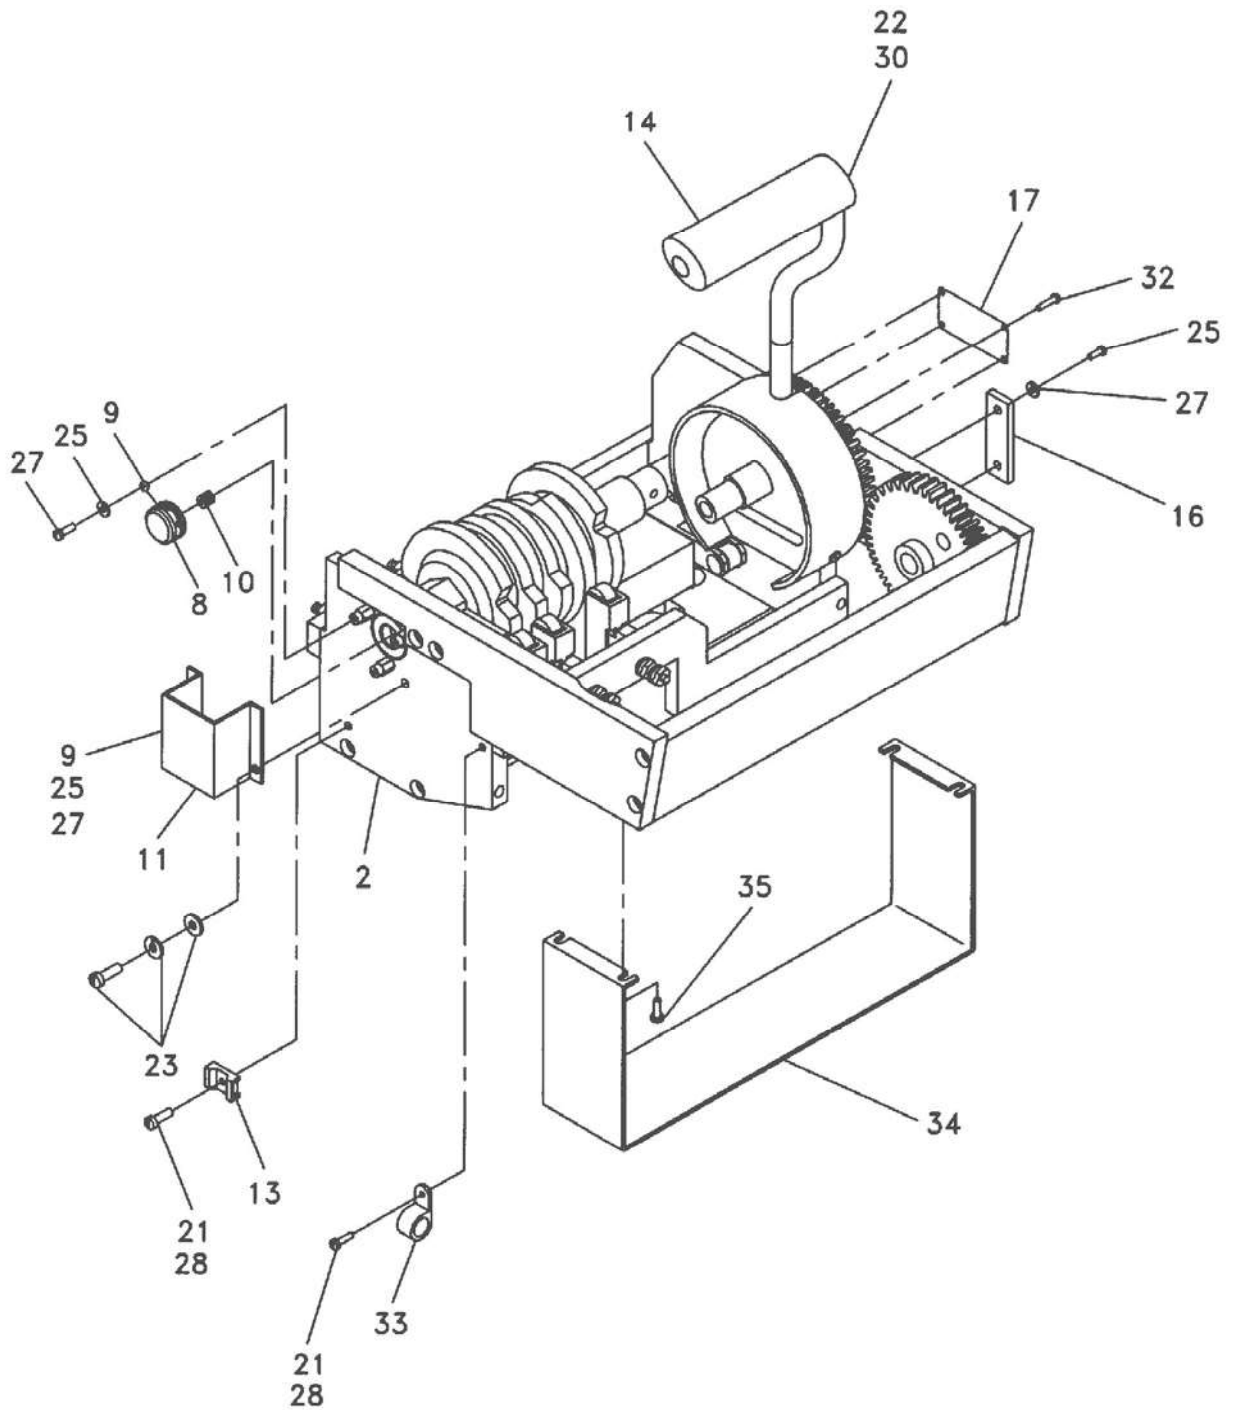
Master Controller Lubrication (Sheet 1 of 3)
